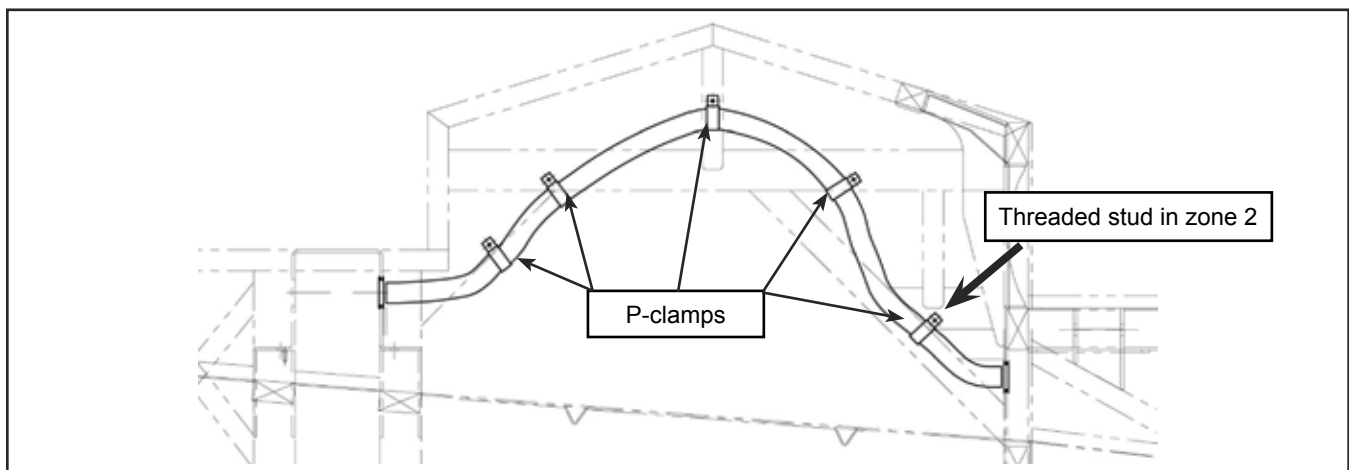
Location of the P-Clamp to Remove and Threaded Stud in Zone 2
